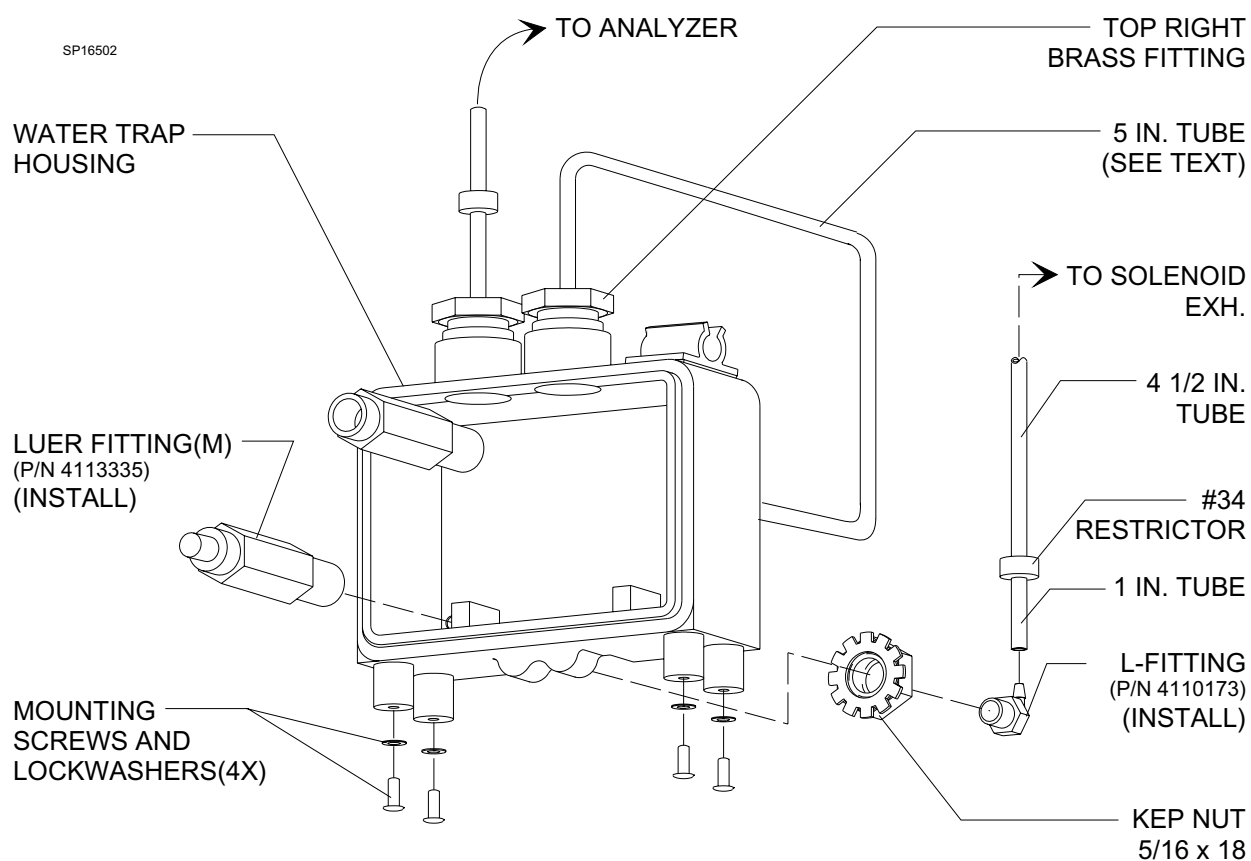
VA3000 WATER TRAP HOUSING ASSEMBLY DETAILS
